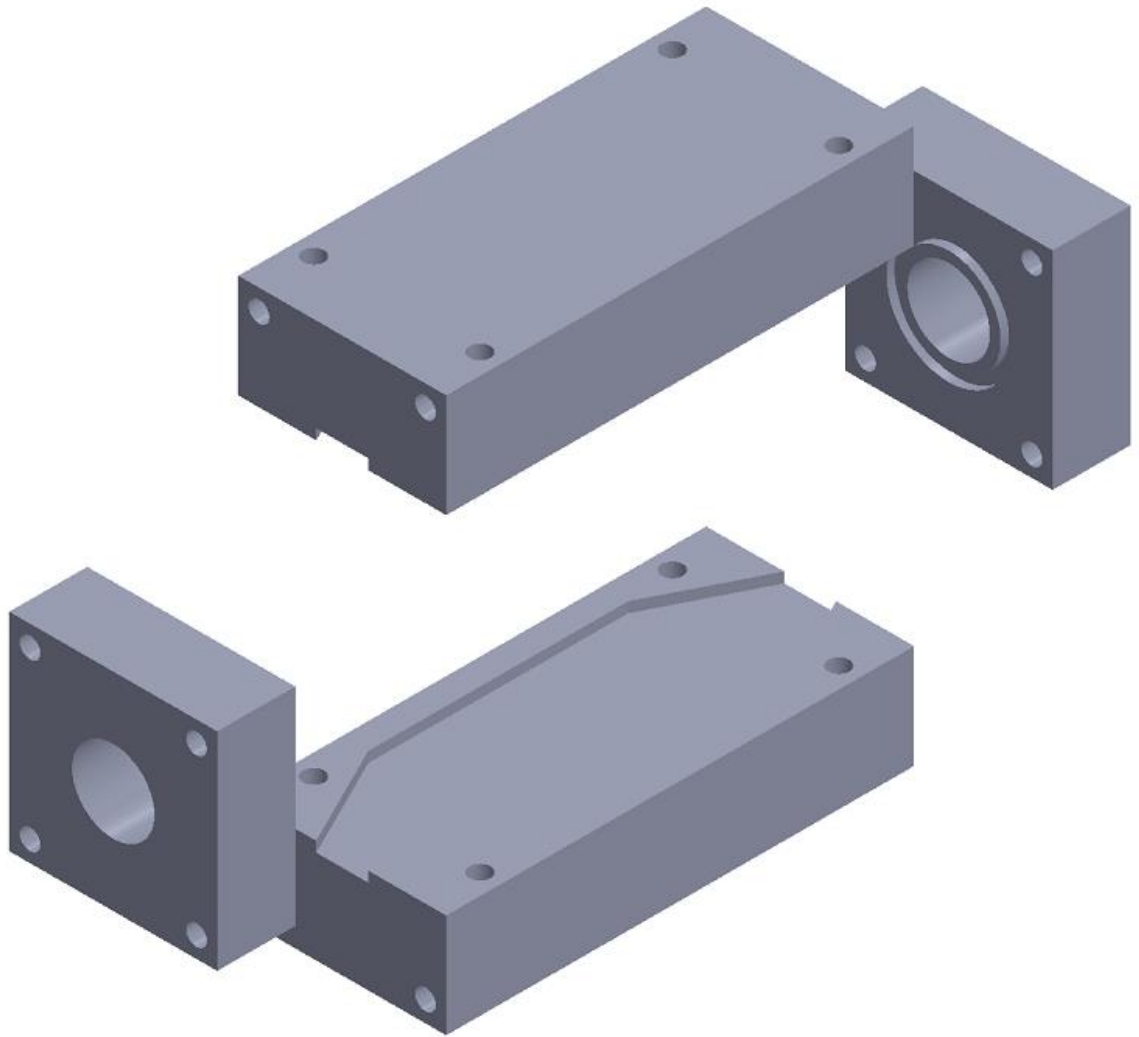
Cold Heat Exchanger Assembly in an Exploded View
